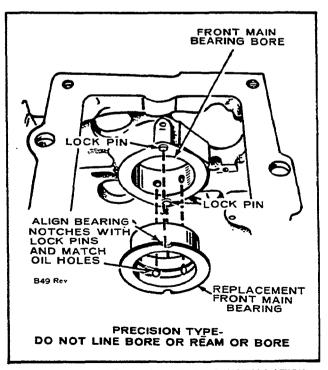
FRONT MAIN BEARING INSTALLATION
